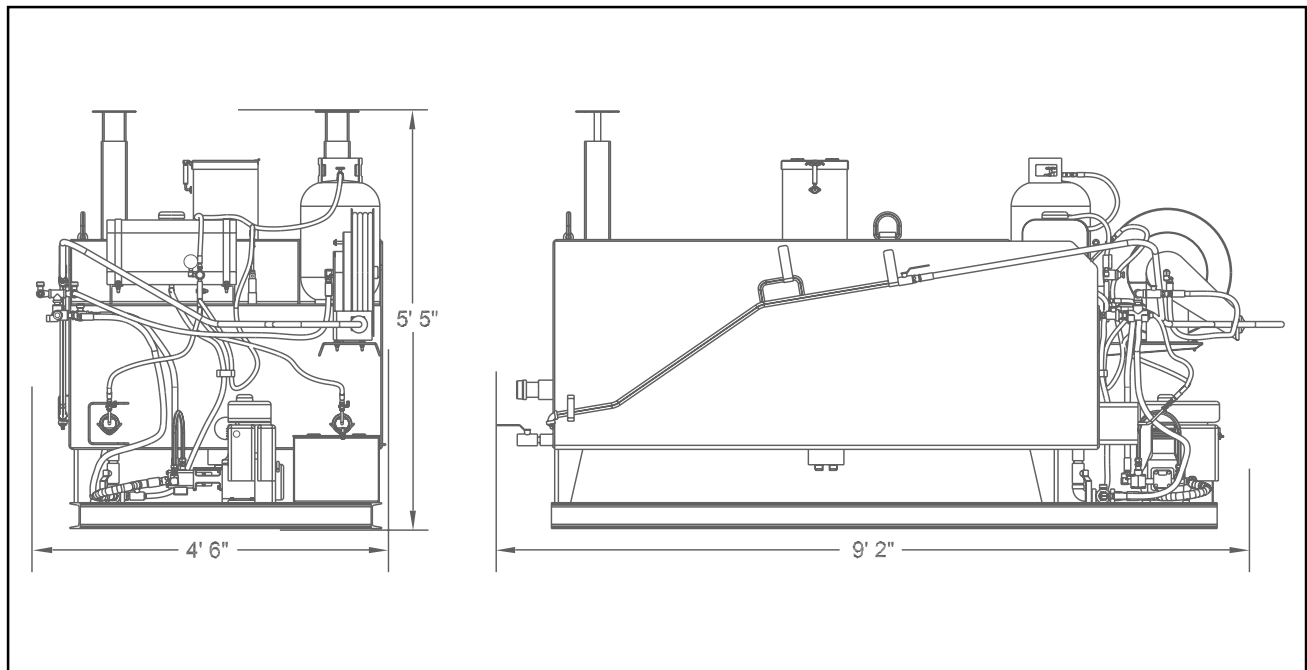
OUTLINE DIMENSIONAL DRAWING - L500S
